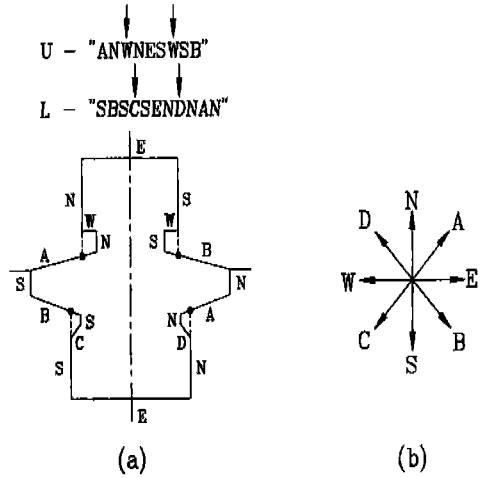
Example of undercut check: (a) machined part; and (b) pattern primitives.
